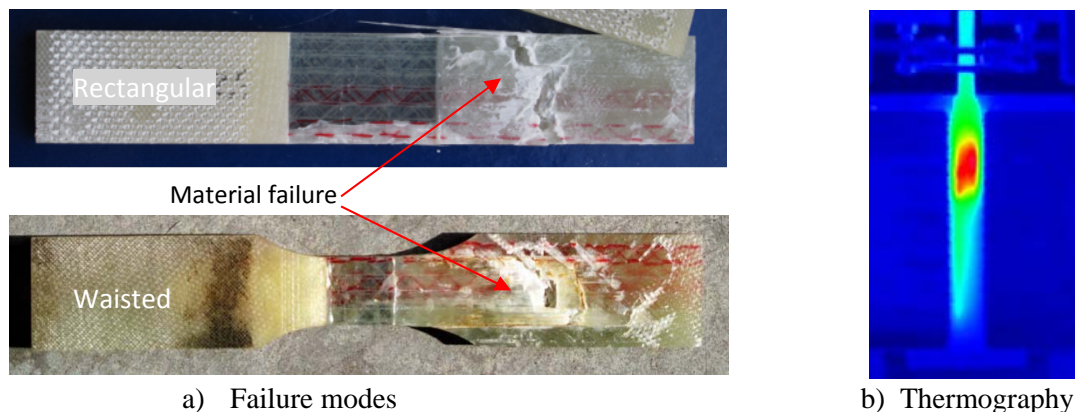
Rectangular and waisted compression/tension fatigue test samples.
